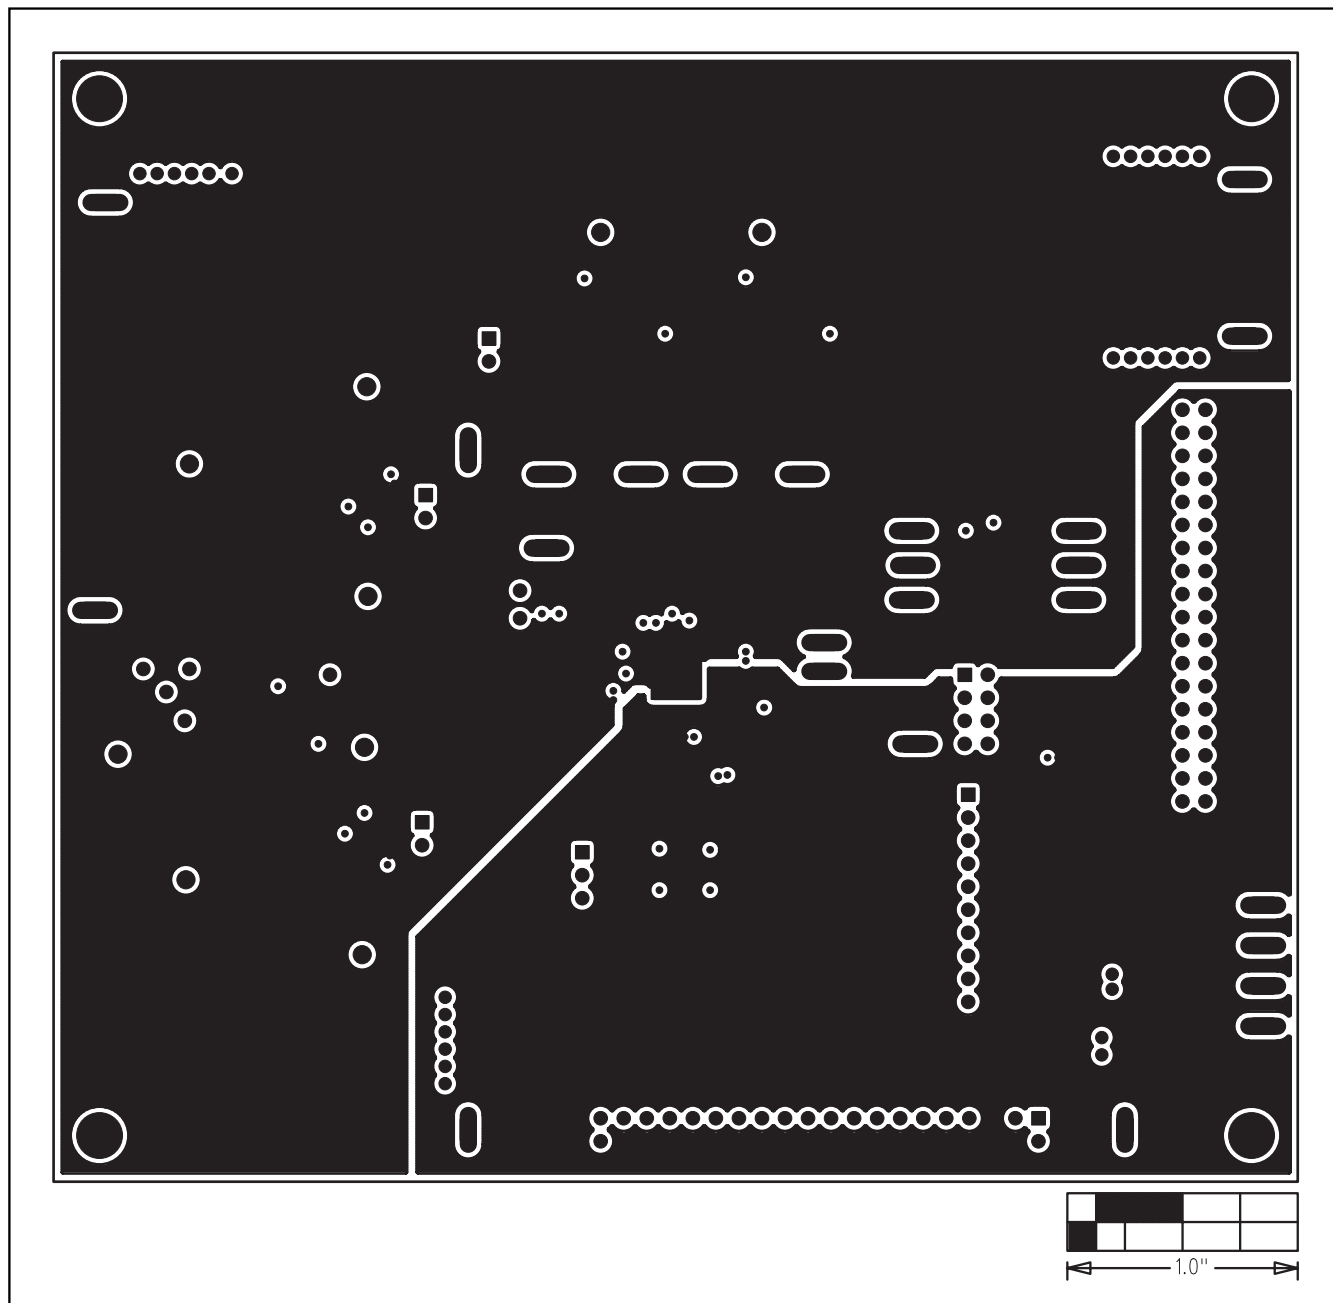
MAX19710-MAX19713 EV Kit PCB Layout (Inner Layer 2)—Ground Planes
